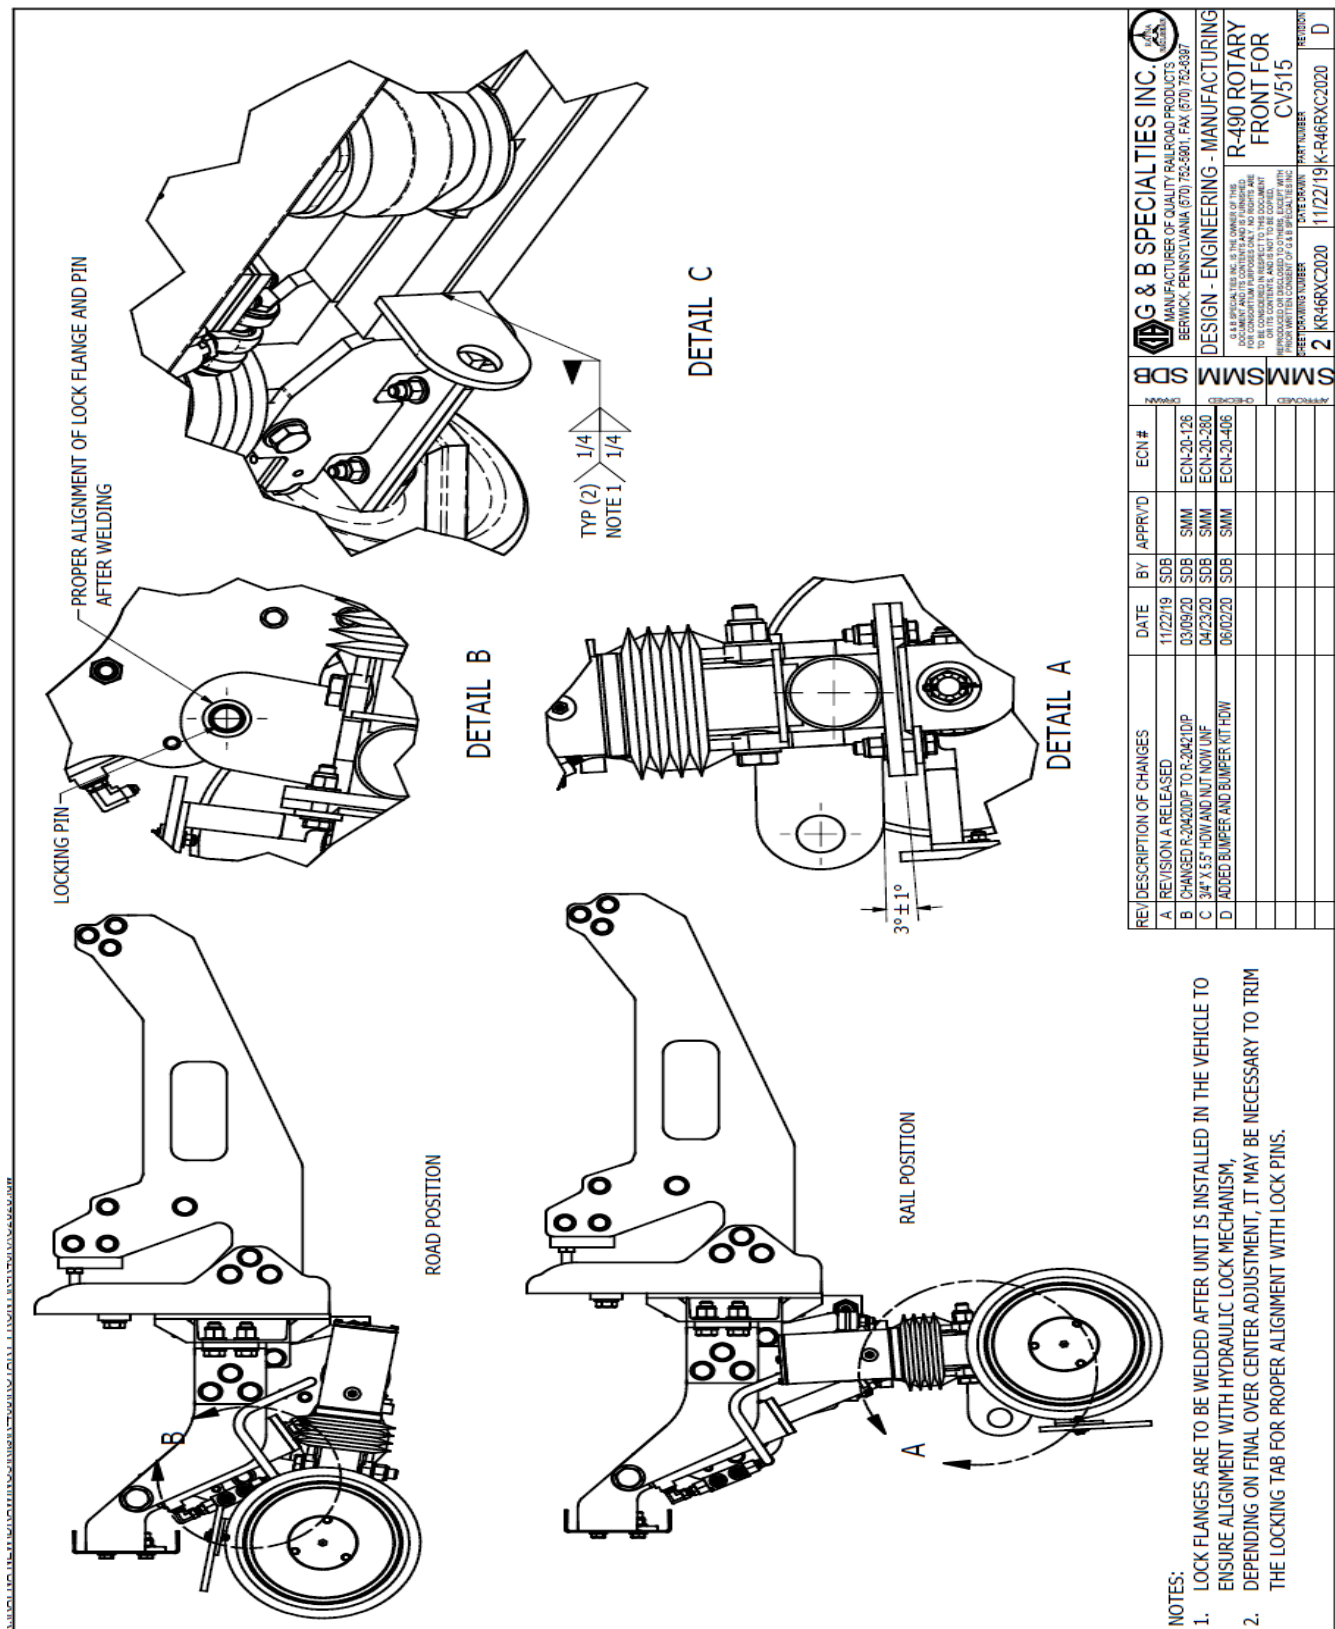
R-490 Rotary Front Railgear Complete Kit Sheet #2 (K-R46RXC2020)
